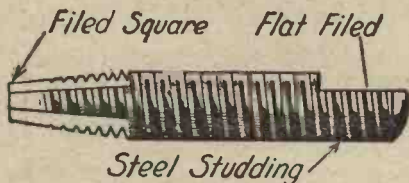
Hard-wearing steel taps may easily be made at home.
